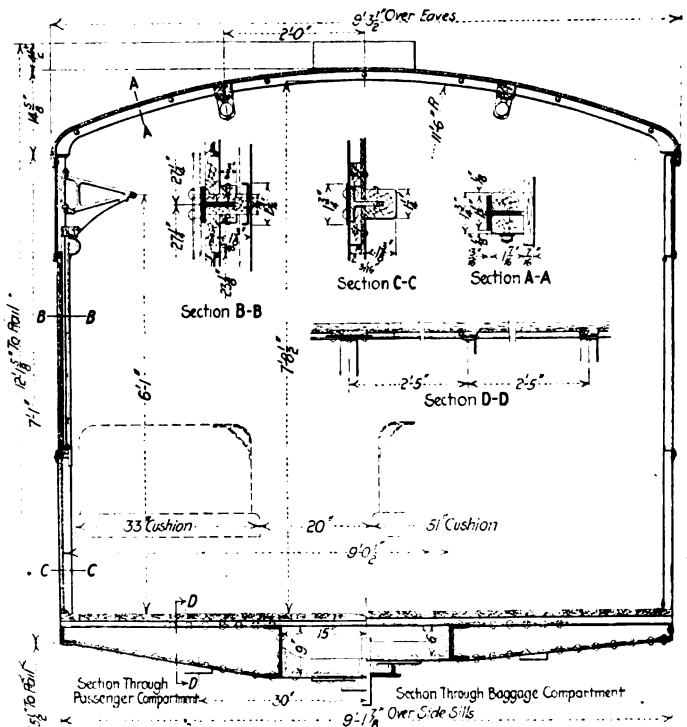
CROSS-SECTION OF THE BODY OF A 55-PASSENGER MOTOR RAILCOACH
